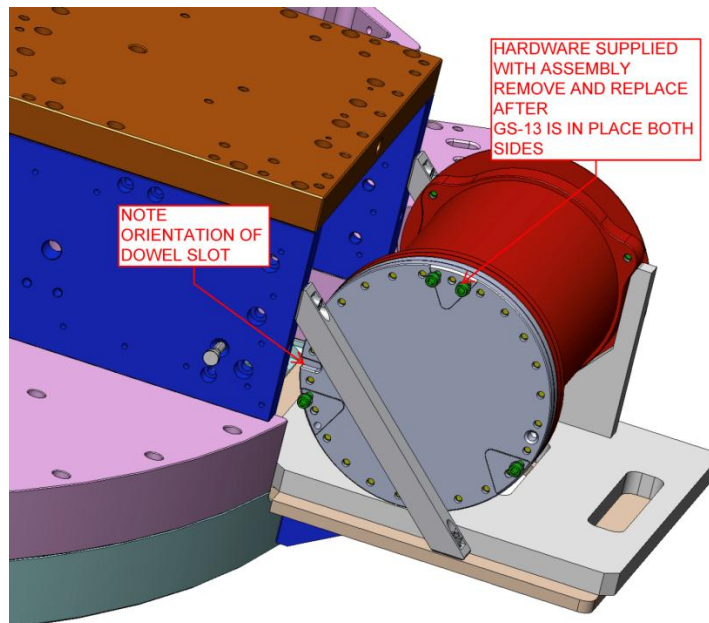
Horizontal GS-13 install-alignment marks should go on the bottom for accurate positioning
